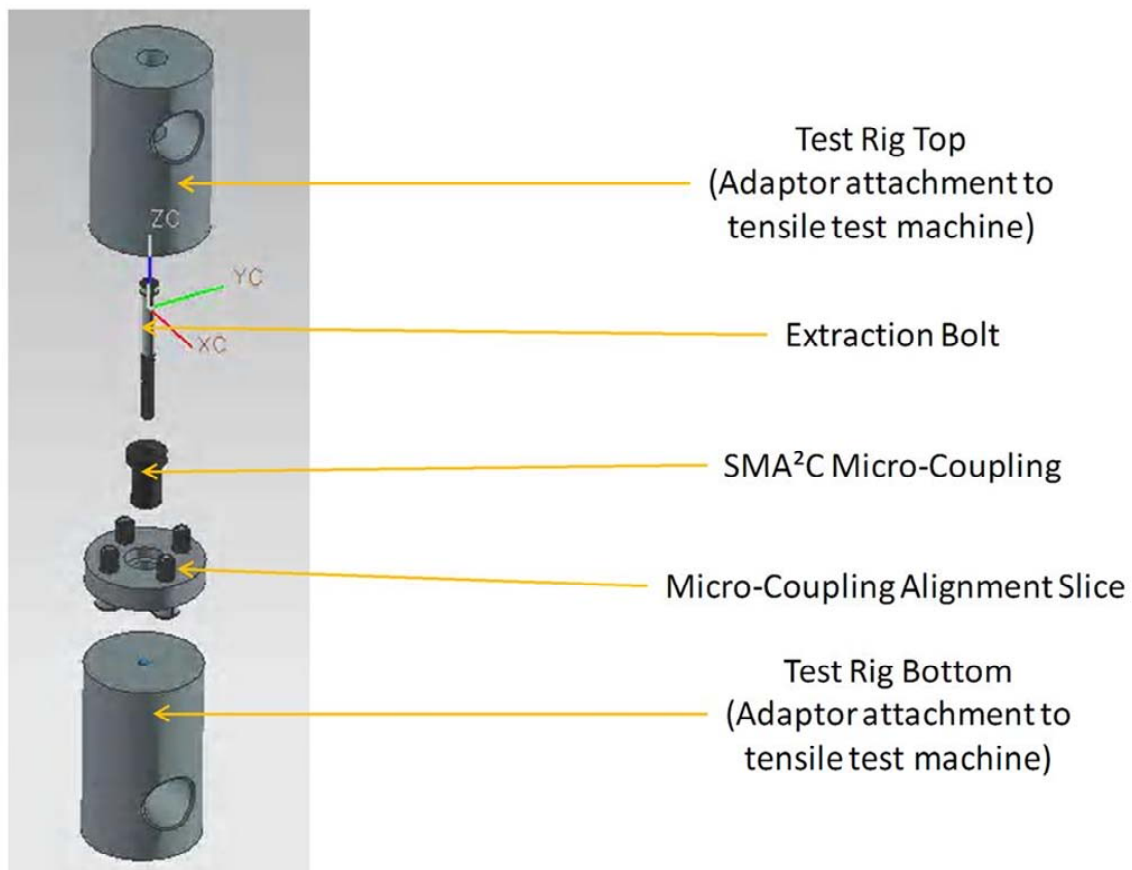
SMA²C Micro-Coupling Load Test Rig Assembly Components
